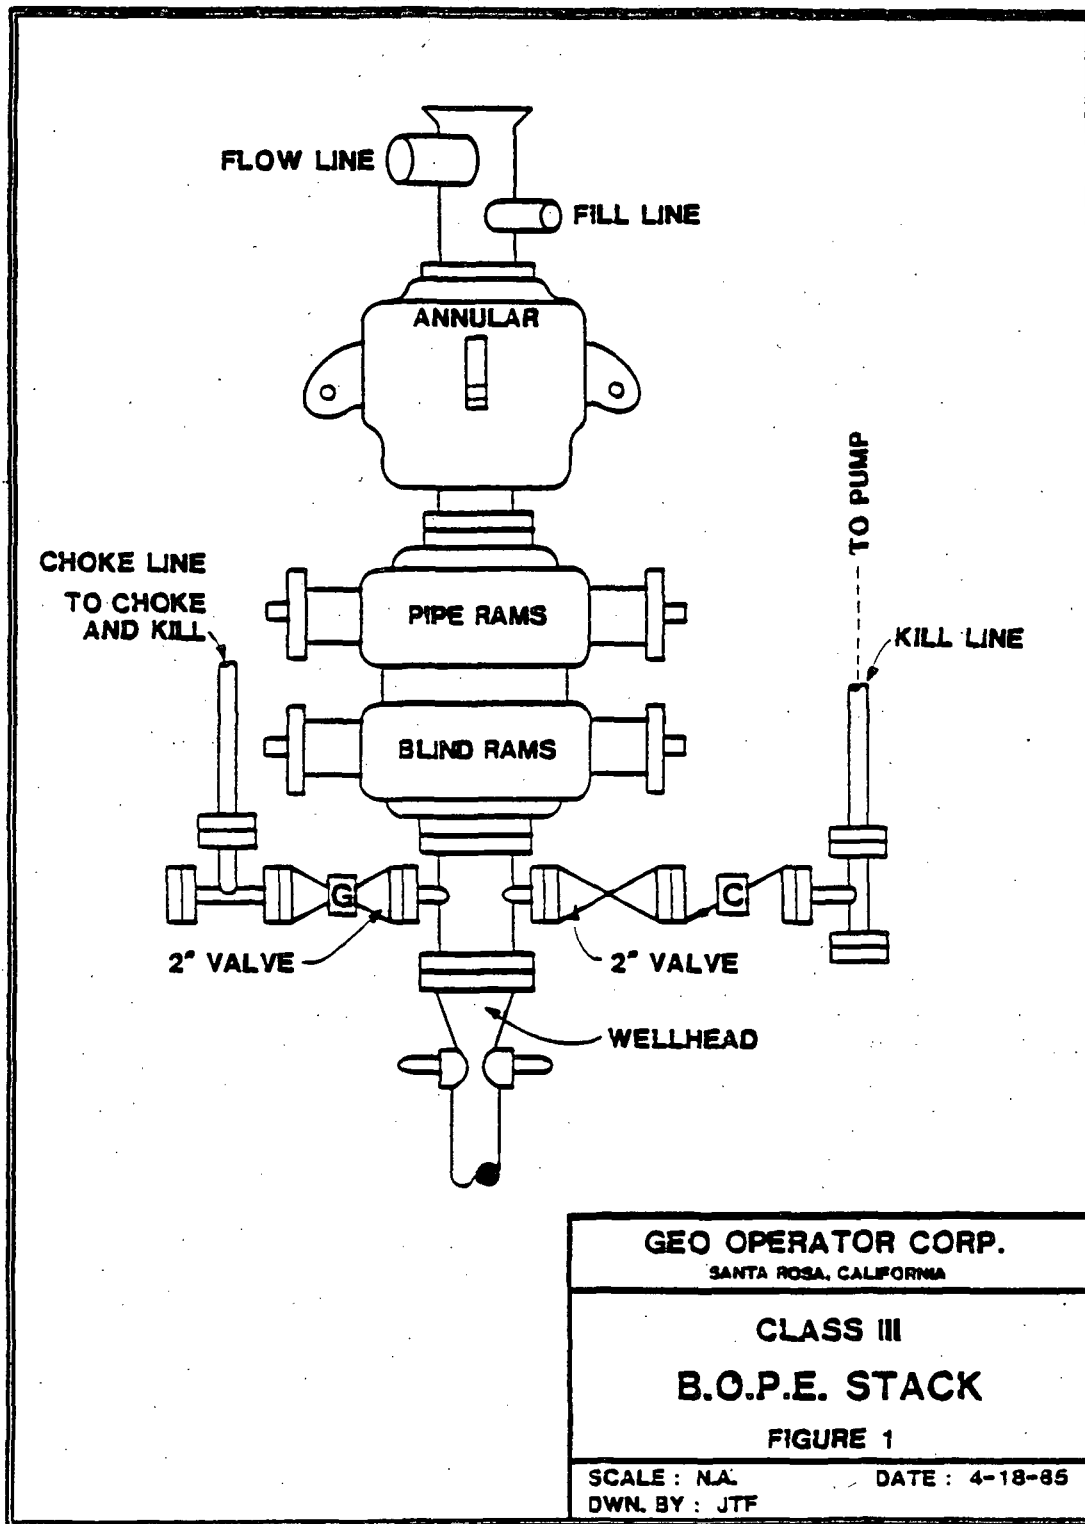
Wellhead assembling and blow out prevention equipment
